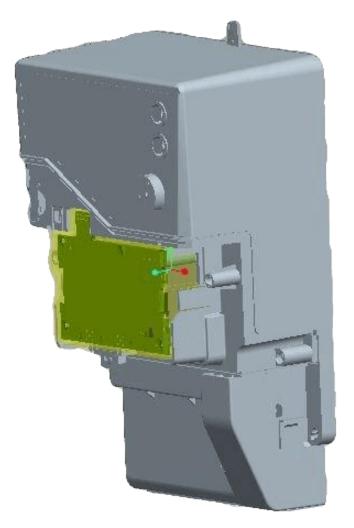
Meter Assembly with TRN-2012 or TRN-2113 Board
